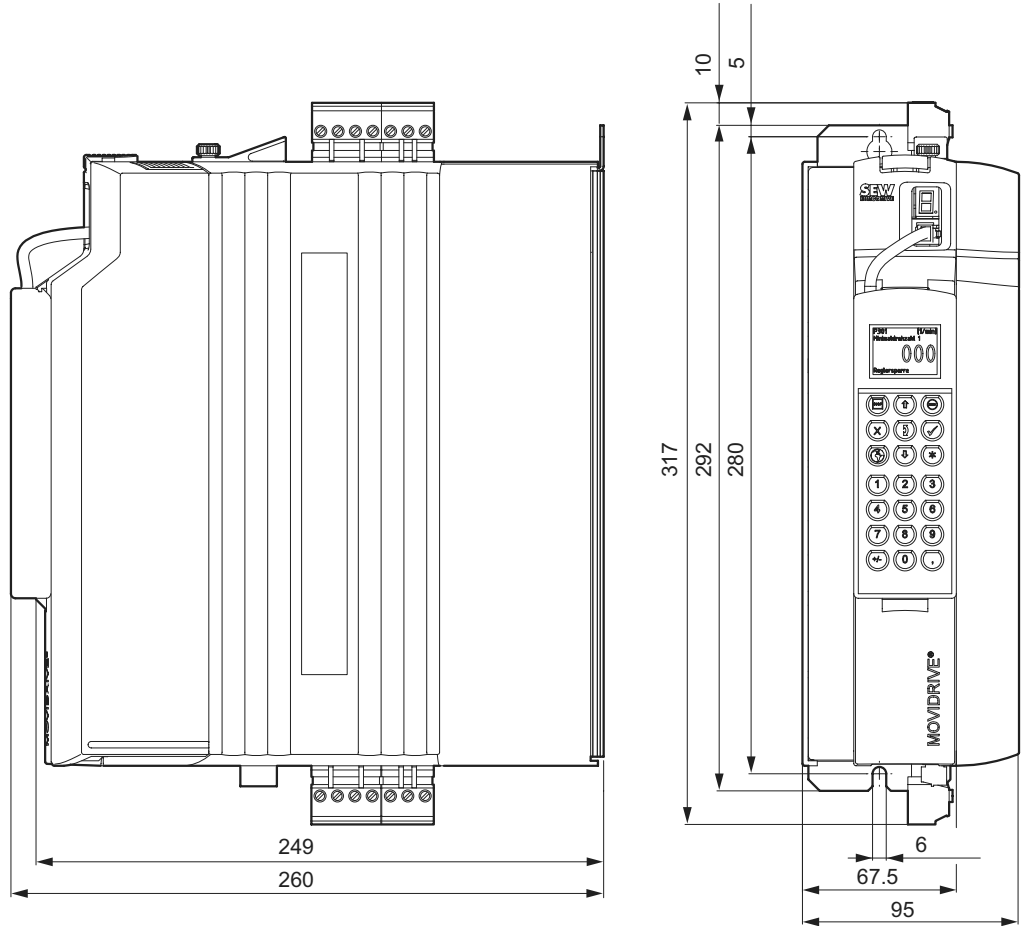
Dimension drawing for MDX61B size 0S, dimensions in mm
